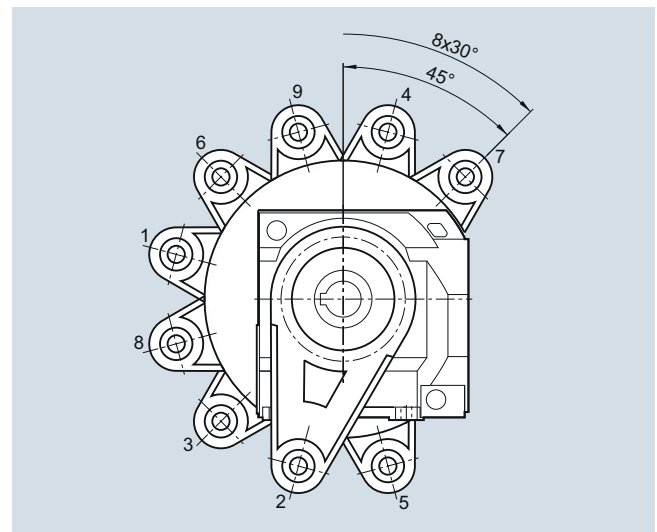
/12 Helical worm gearboxes CAD., Figure 2, sizes 39 to 89
